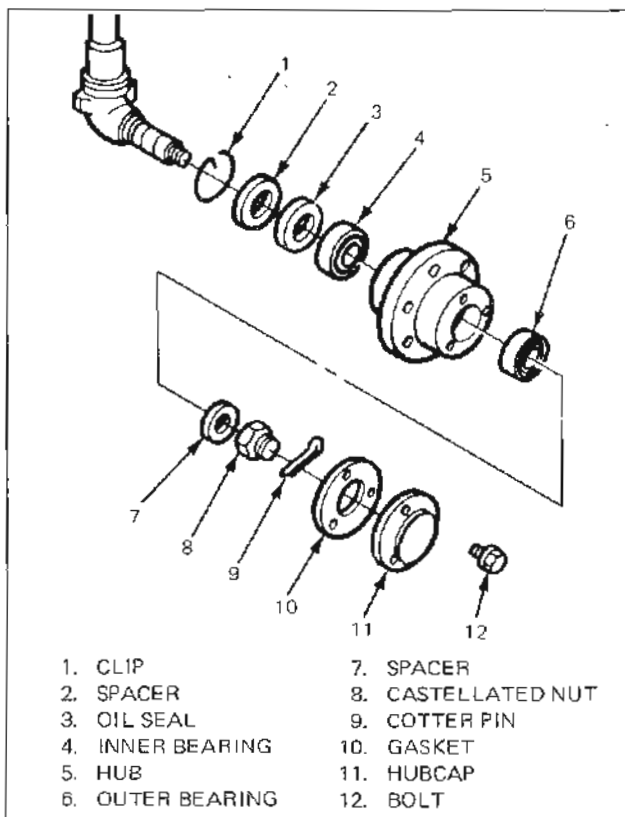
Servicing Front Wheel Bearing—Two-Wheel Drive (SD4300 and SD5000T)
